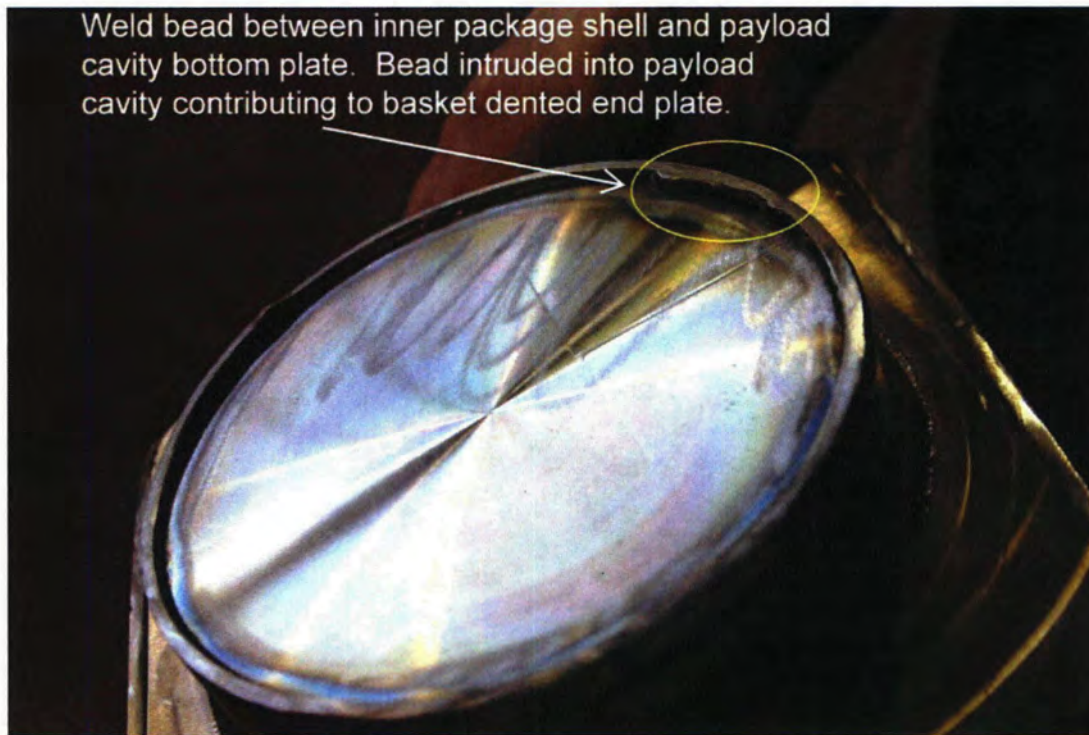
Weld bead protruding into package payload cavity (inner shell has been removed in this photo)
